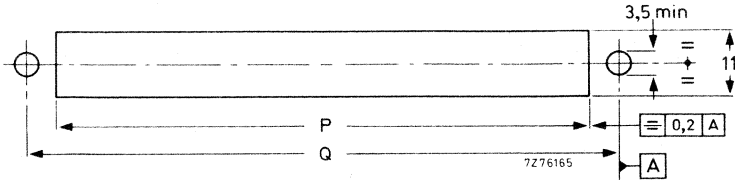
Panel cut-out; see Table 3 for dimensions P and Q.
